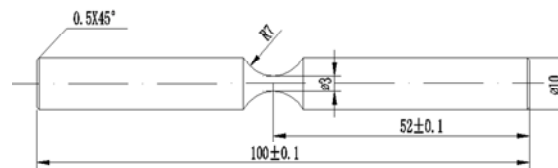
Schematic drawing of the specimens (dimensions in mm).
